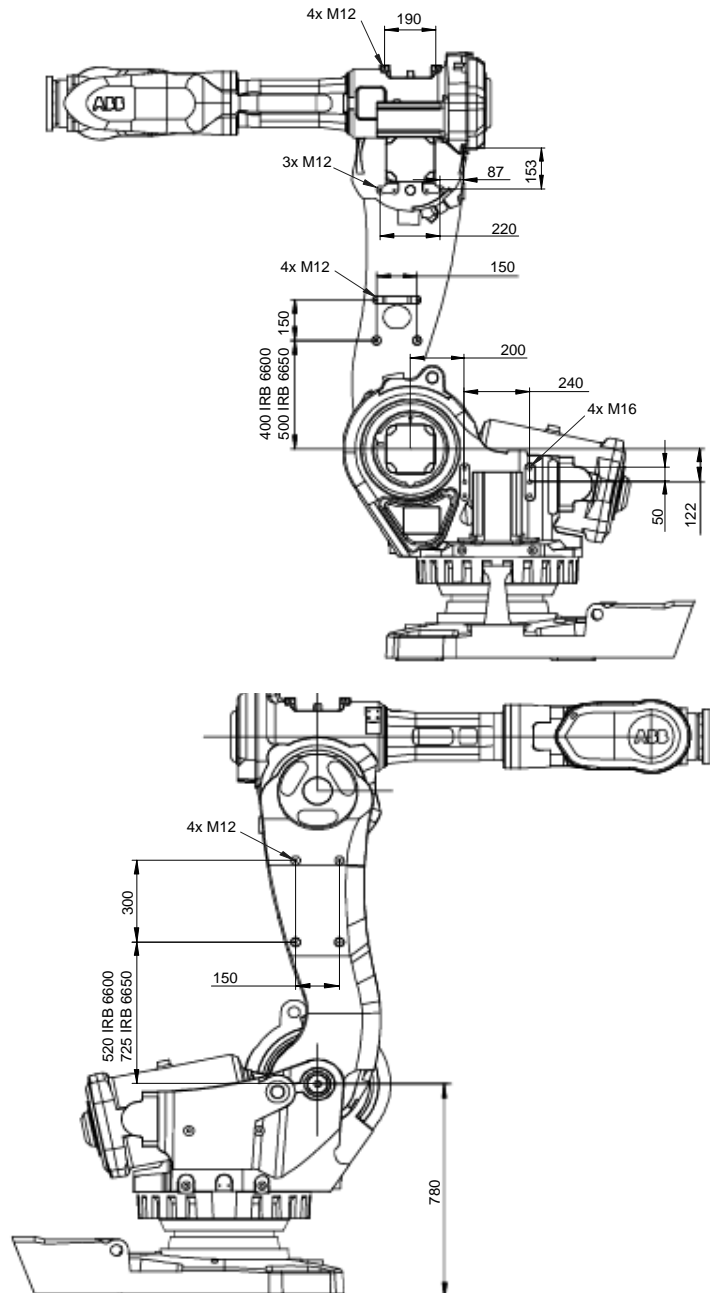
Holes for mounting extra equipment on the upper and the lower arm, and the frame on IRB 6600/6650 (dimensions in mm).
